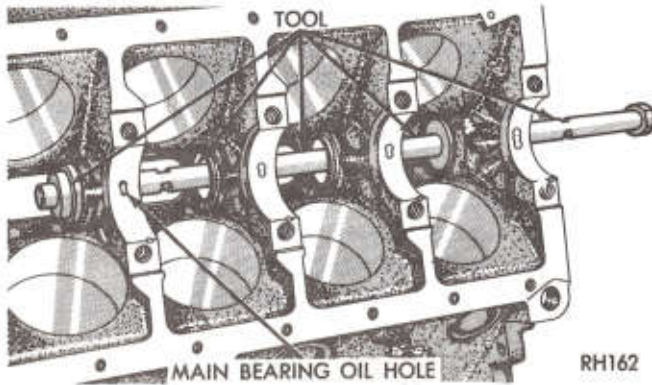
Removal and Installation of Camshaft Bearings with Tool C-3132A
